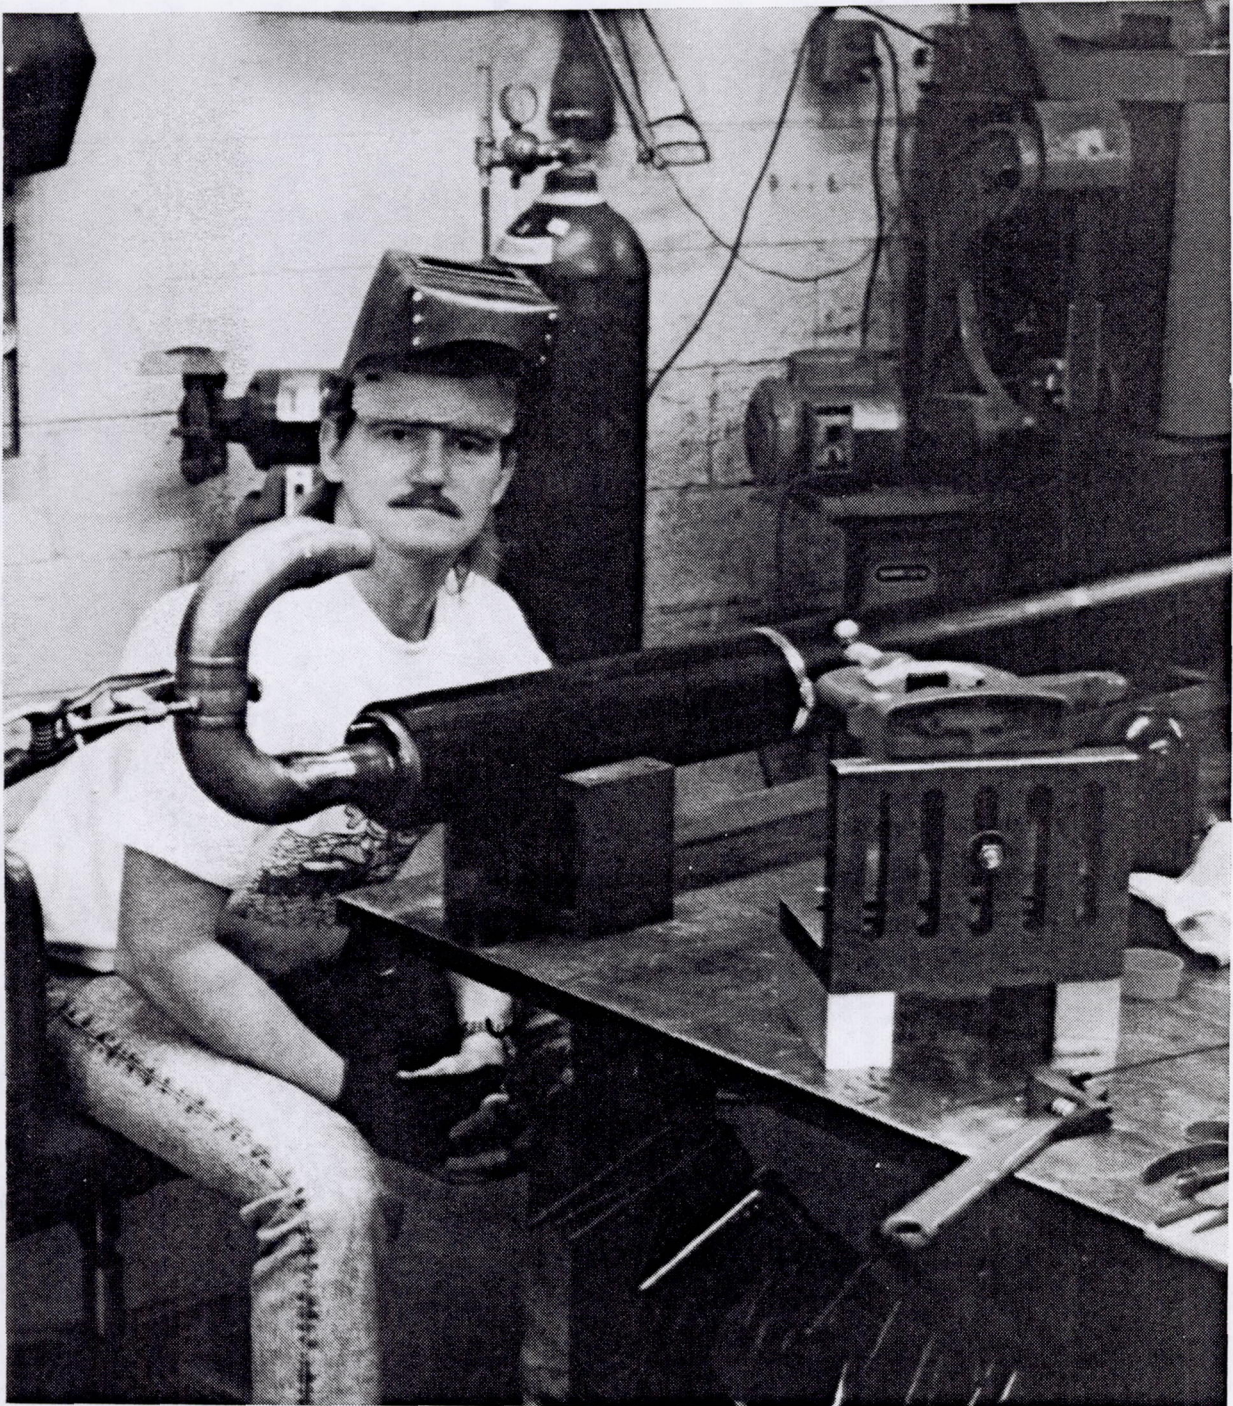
Welding the Pipe to Tube "U" Transition Section to the Inlet End of the Heat Storage Tubes
